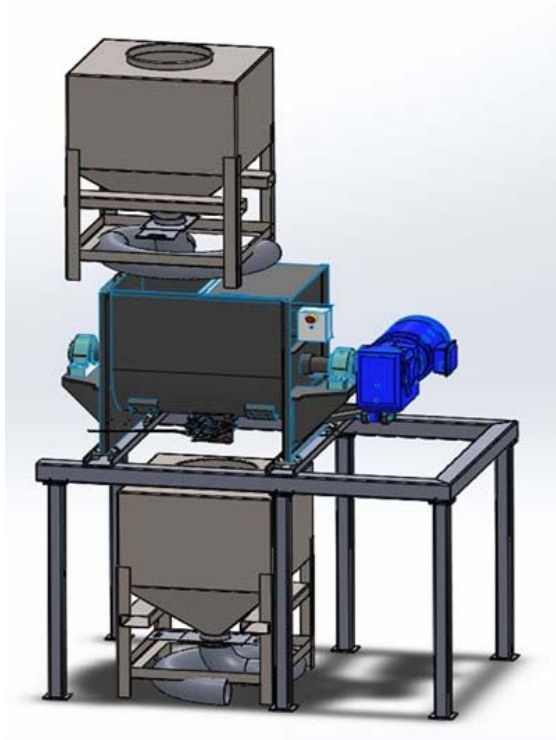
Depiction and picture of the ceramic mixer and tool casting system
